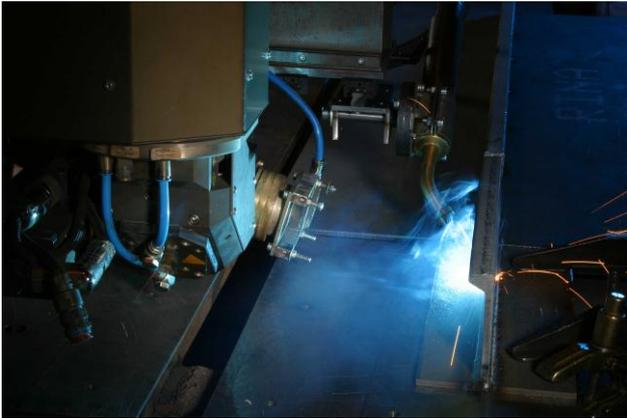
Hybrid laser welding of a structural steel case
